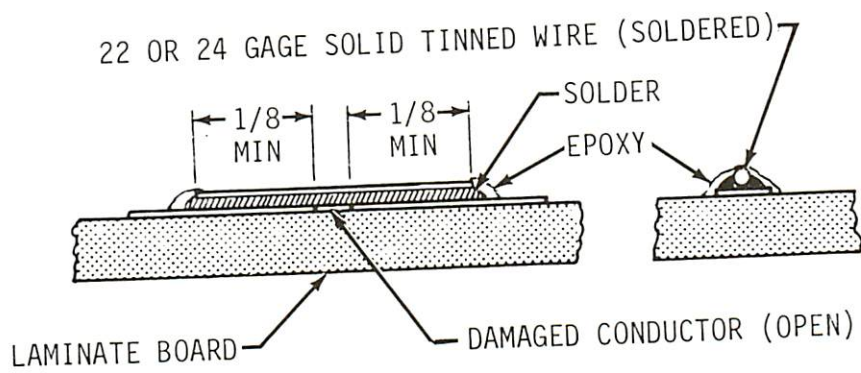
TYPICAL PRINTED WIRING DAMAGE
